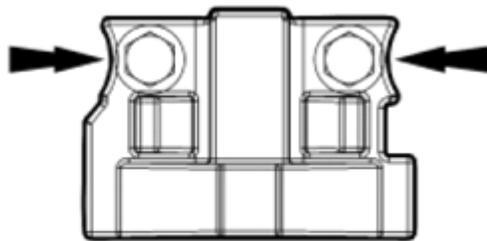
Locating Camshaft Phaser Sprocket Bolt
